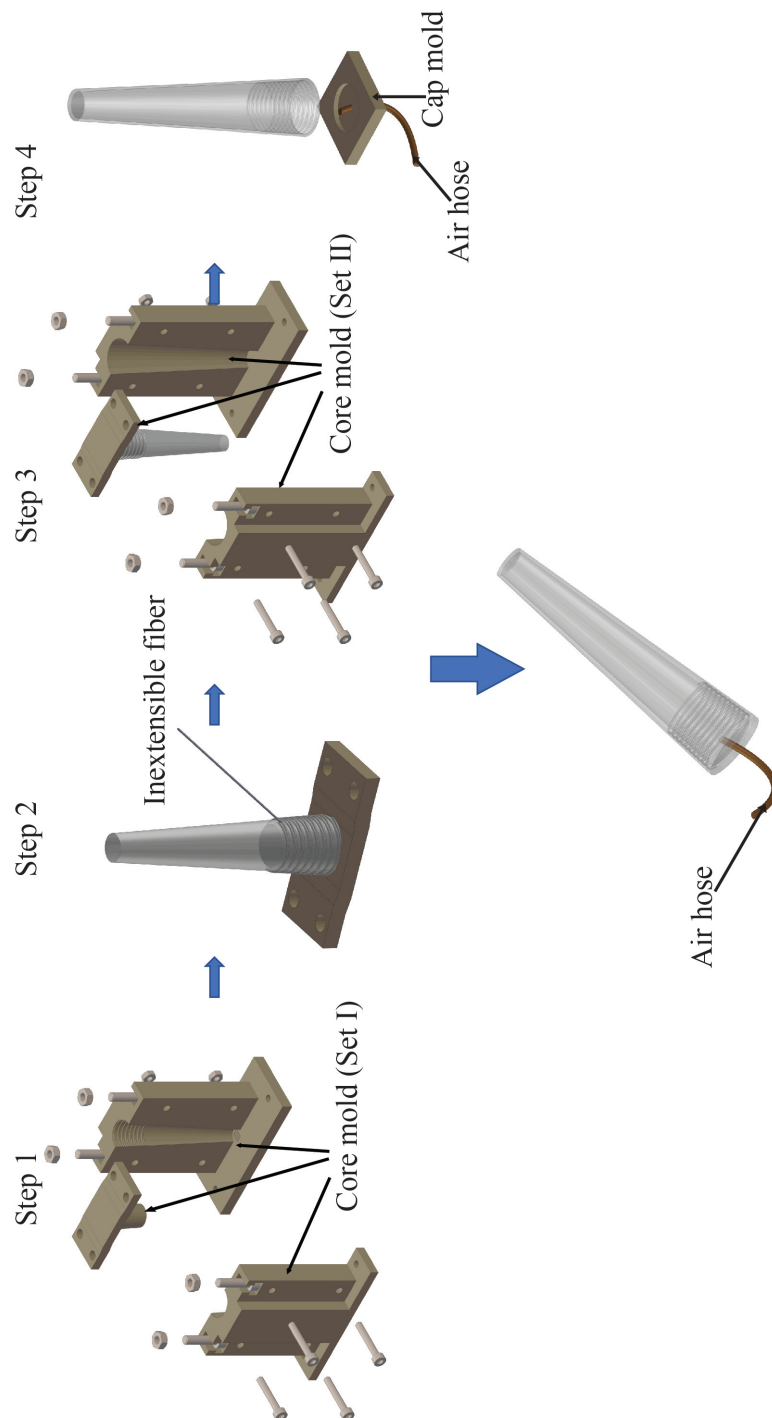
Fabrication procedure consisting of 4 consecutive steps: Step 1: Mold the inner layer of the whisker body using the core molds *set I*. Step 2: remove the body's mold but leave the medulla mold to hold the shape of the chamber, then wrap slightly with the nylon fiber. Step 3: Coat an outer skin to keep the reinforced fiber in place with the core mold *set II*. Step 4: remove the body and the head mold then dip the big end into a thin layer of Dragon Skin 30 inside the combination of cap mold and an air hose.
